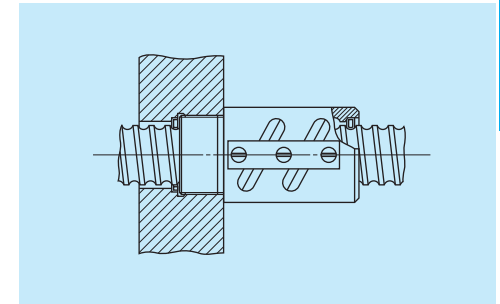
Installation of brush-seal to a ball nut with thread screw
